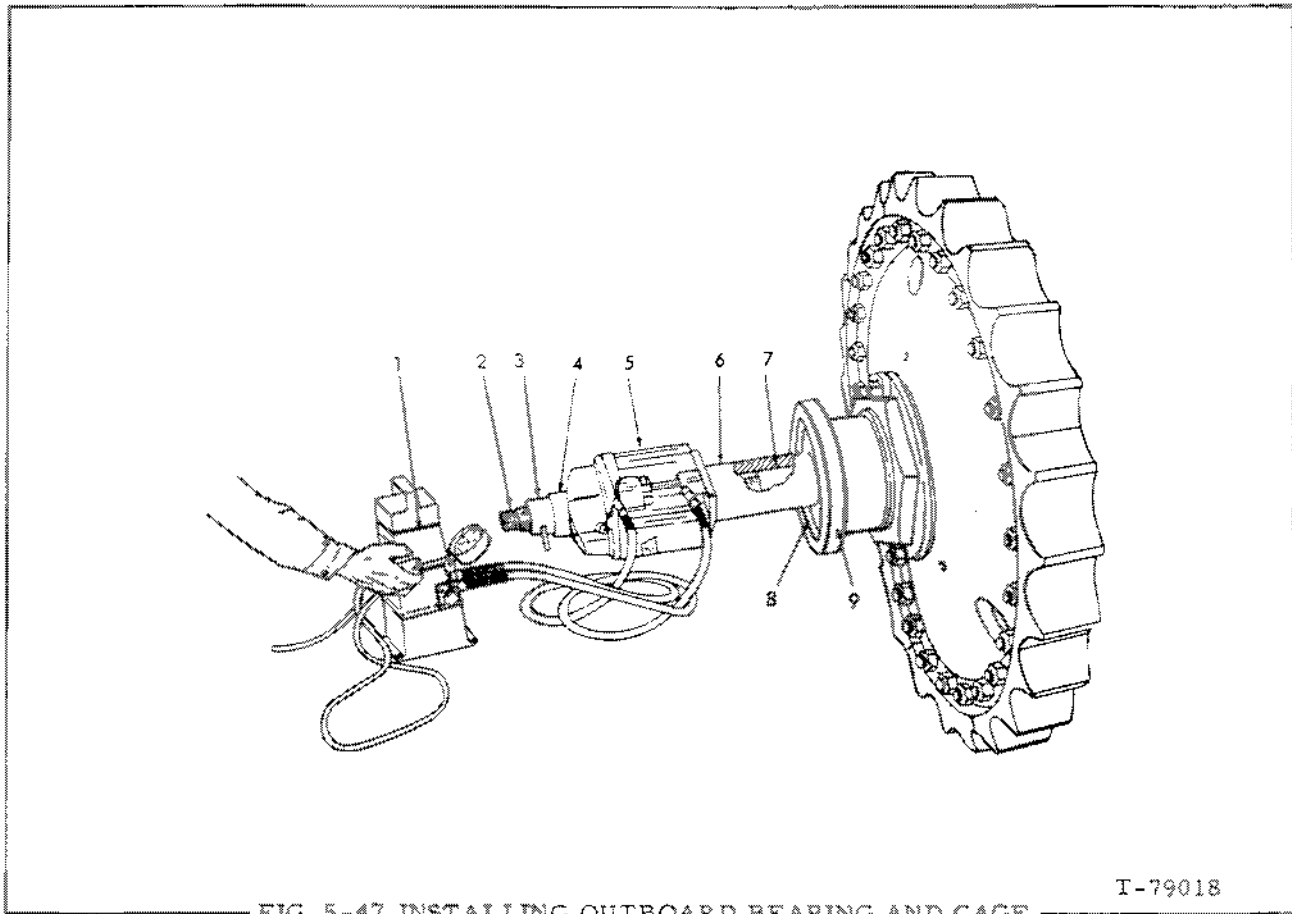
INSTALLING OUTBOARD BEARING AND CAGE
